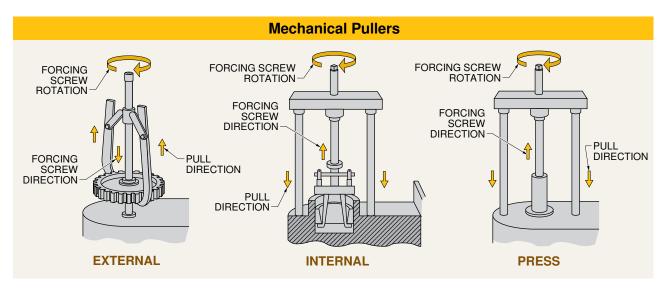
Mechanical pullers are used to remove fitted machine parts such as sprockets, gears, pulleys, and bearings.
